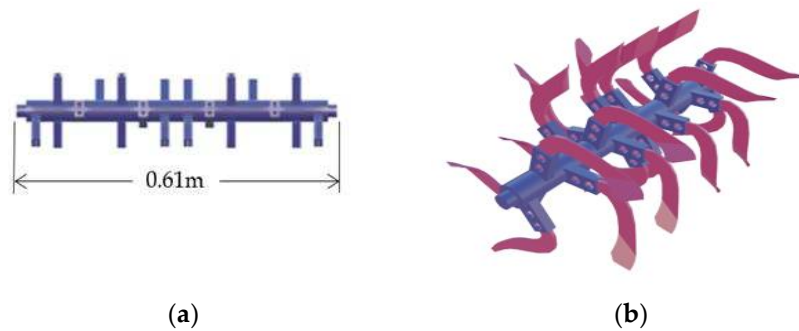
Rotary tiller (a) shaft without tyne blades (b) shaft with tyne blades arrangement.
